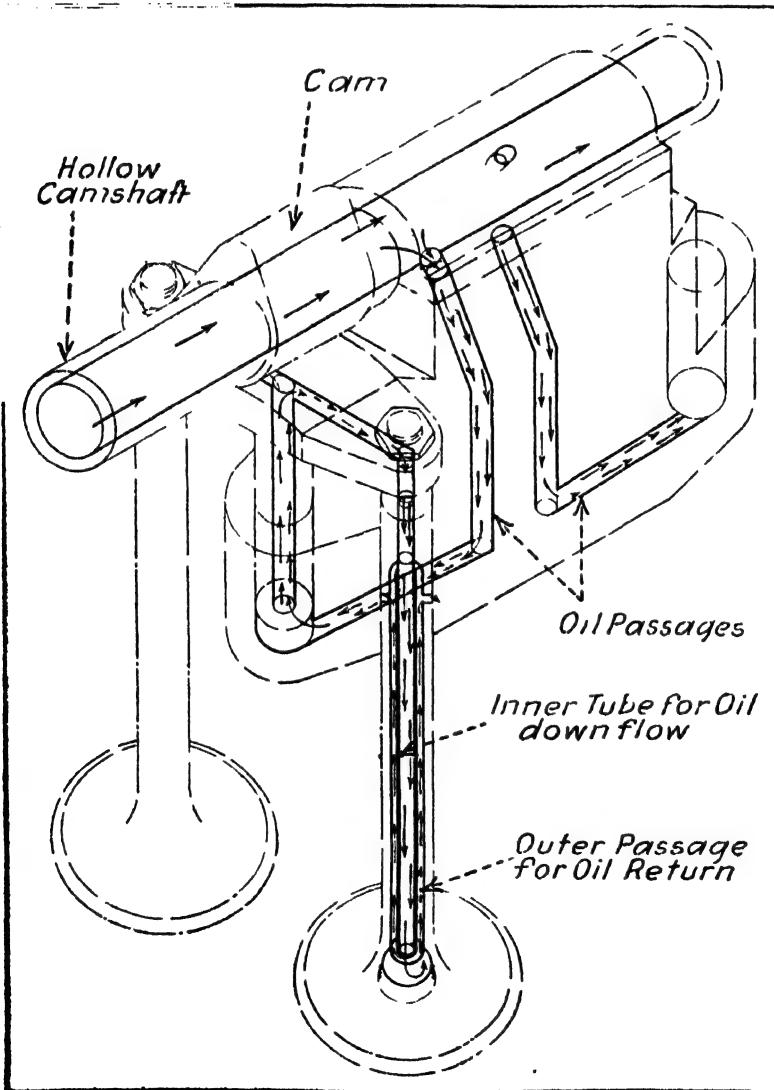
Diagram Showing Oil Circulation Through Exhaust Valves of Packard Aircraft Engines Models 2A-1500 and 2A-2500 to Keep Valves Cool.
